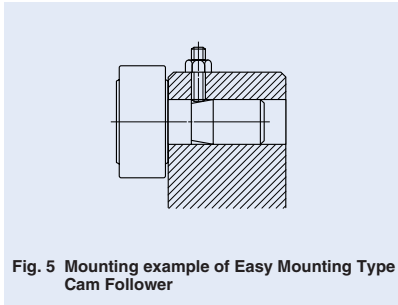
Mounting example of Easy Mounting Type Cam Follower
